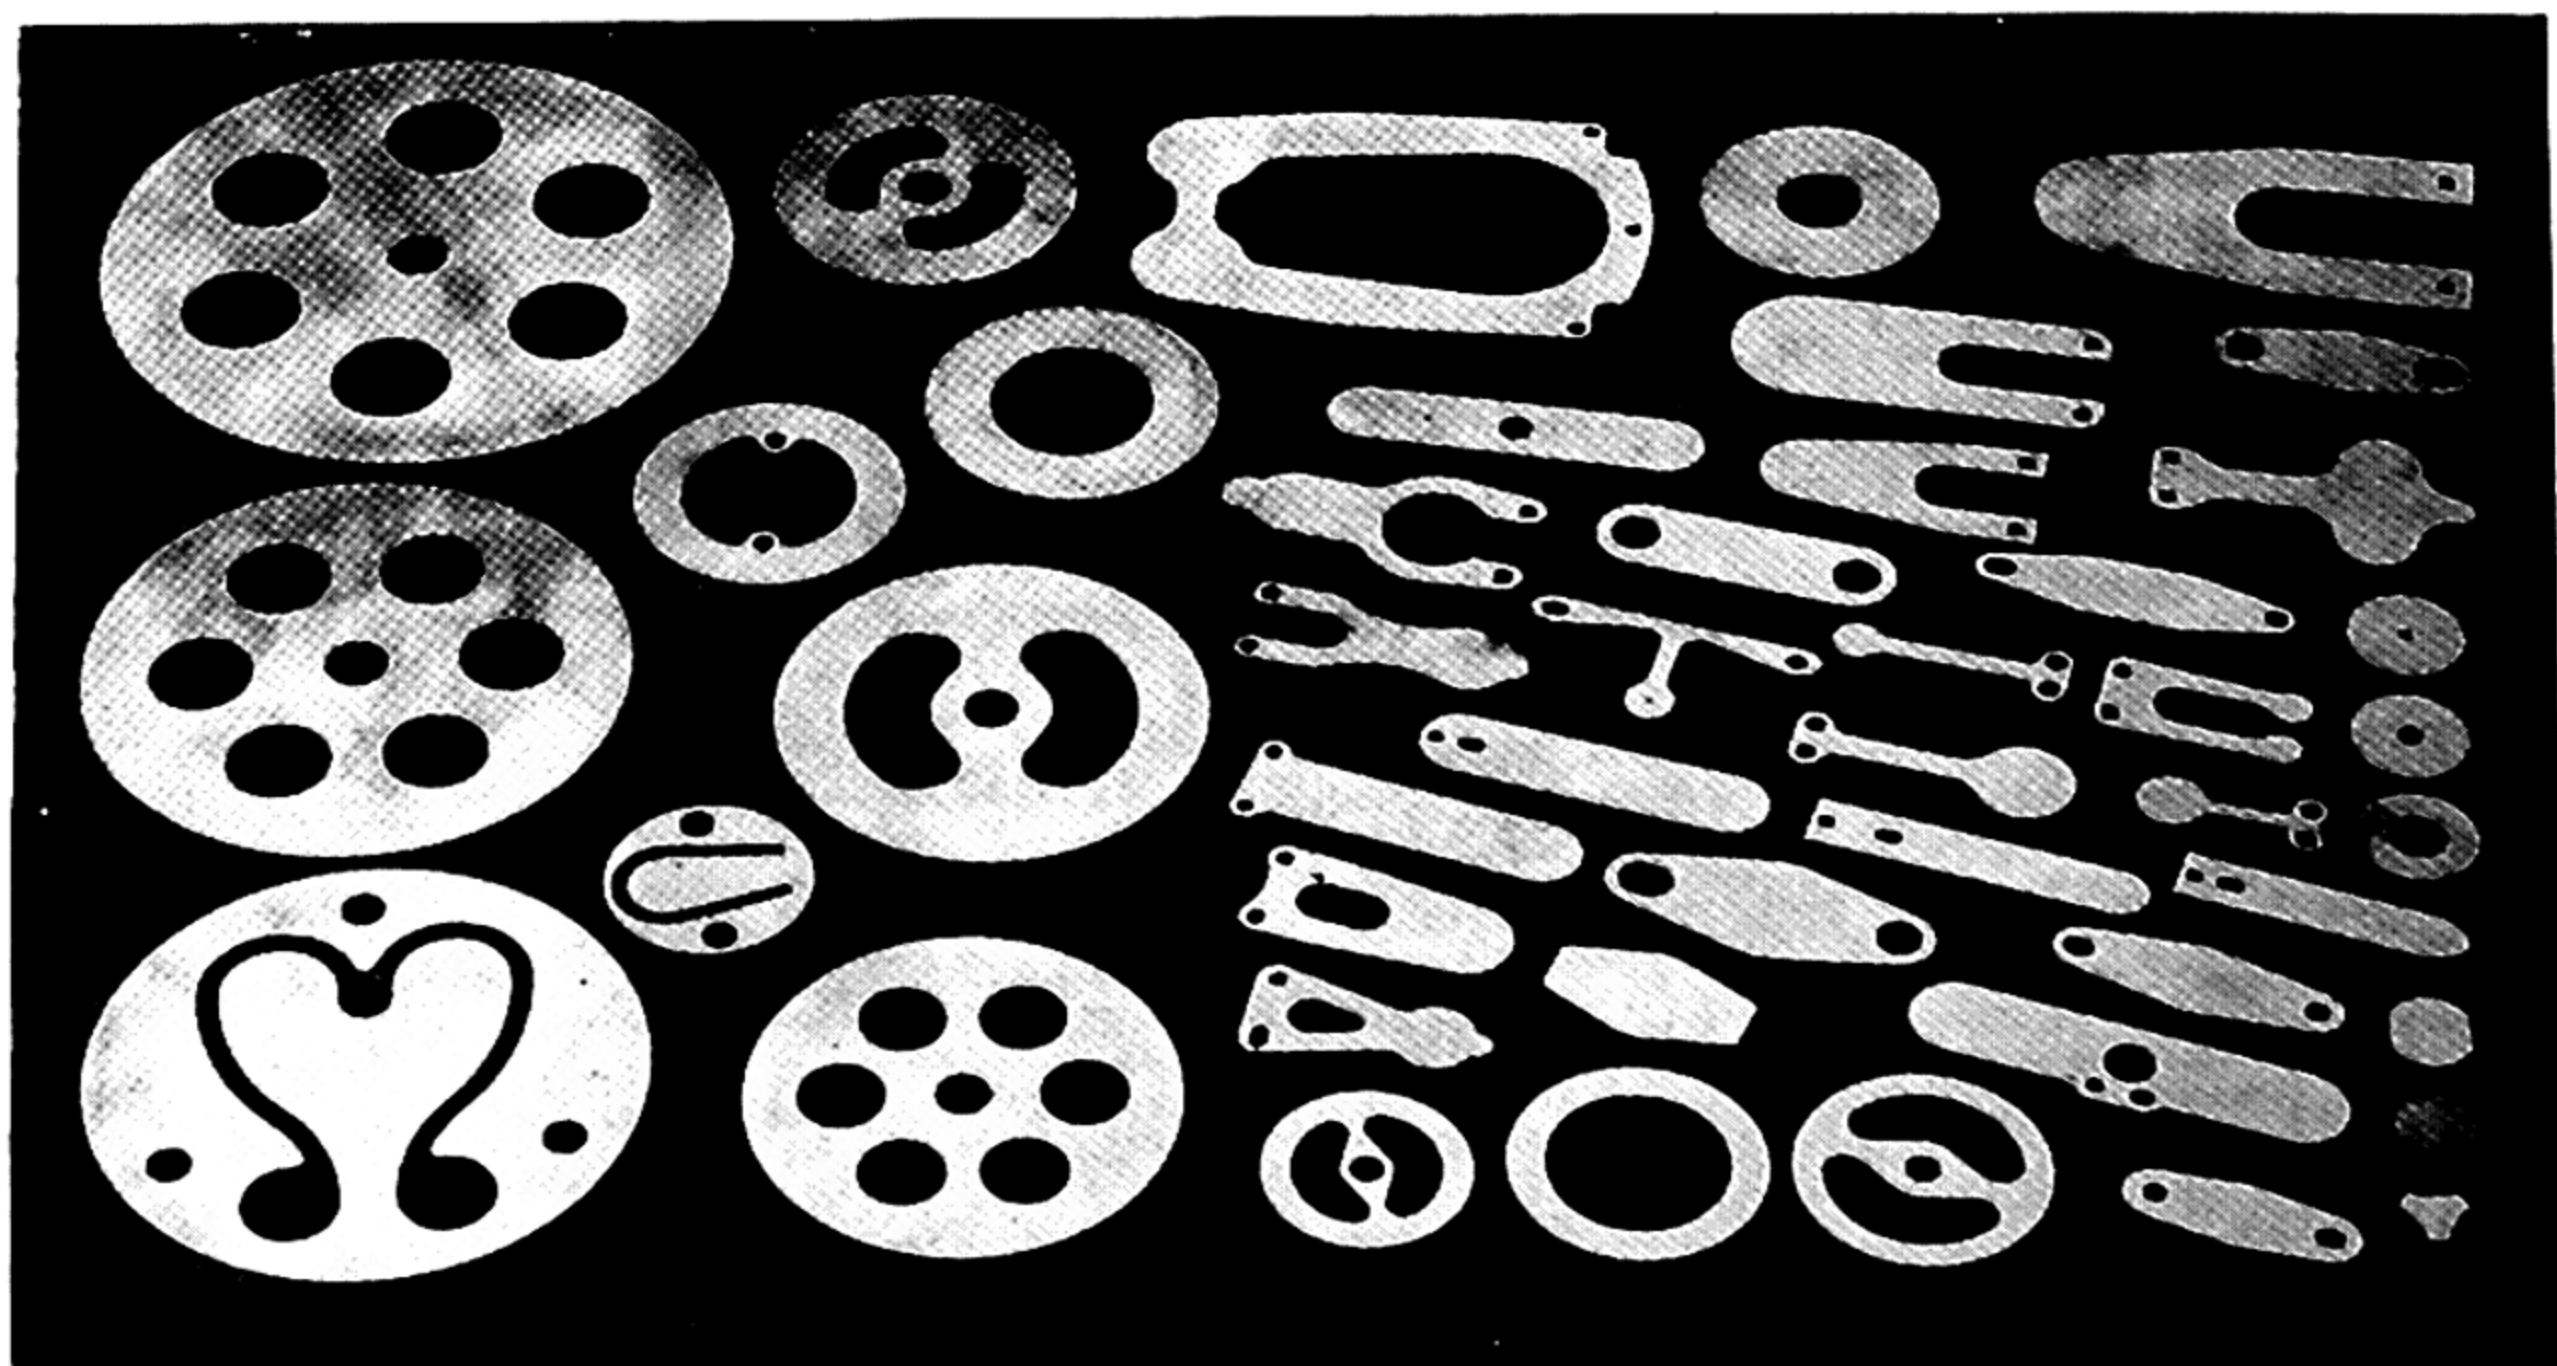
Various designs of fractional-tonnage compressor flexing valves. Courtesy Detroit Stamping Co.
